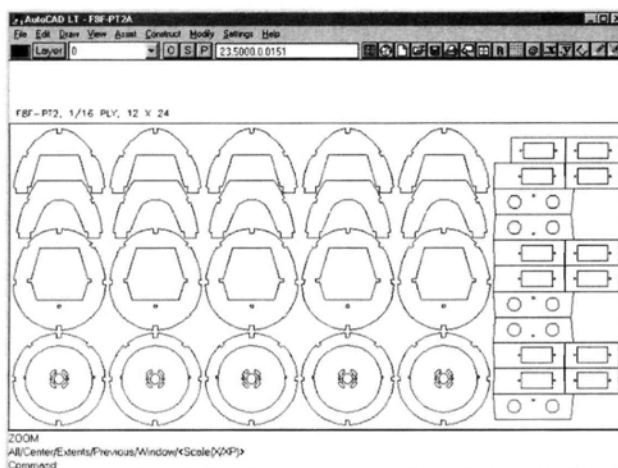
This view shows how parts have been arranged to make optimum use of a sheet of plywood. Note that wherever possible, parts share edges; this saves laser cutting time and material. No part should touch the edge of the rectangle that defines the size of the plywood sheet.
